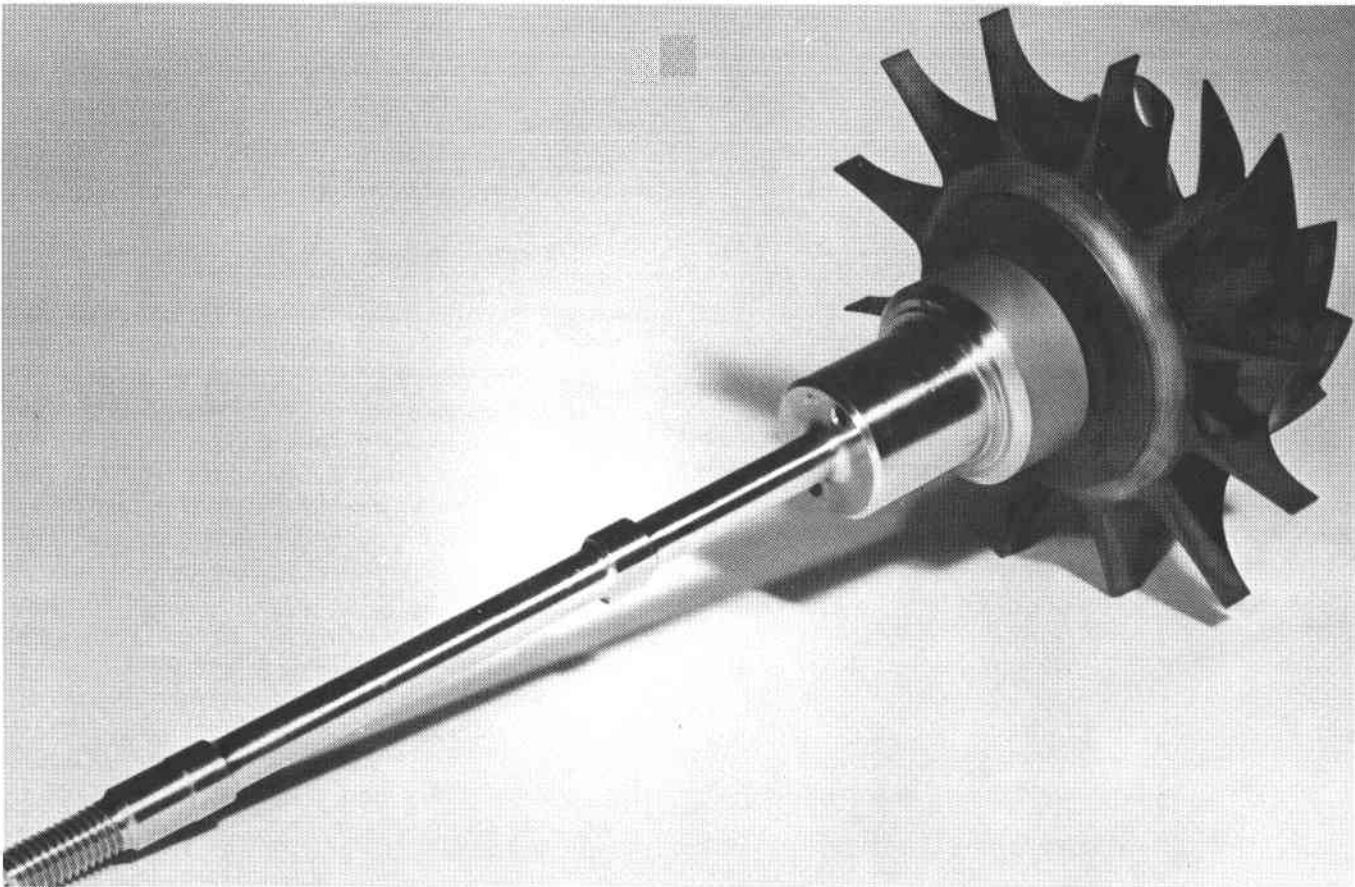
First finish-machined gasifier rotor/shaft assembly, serial number FX34307.
